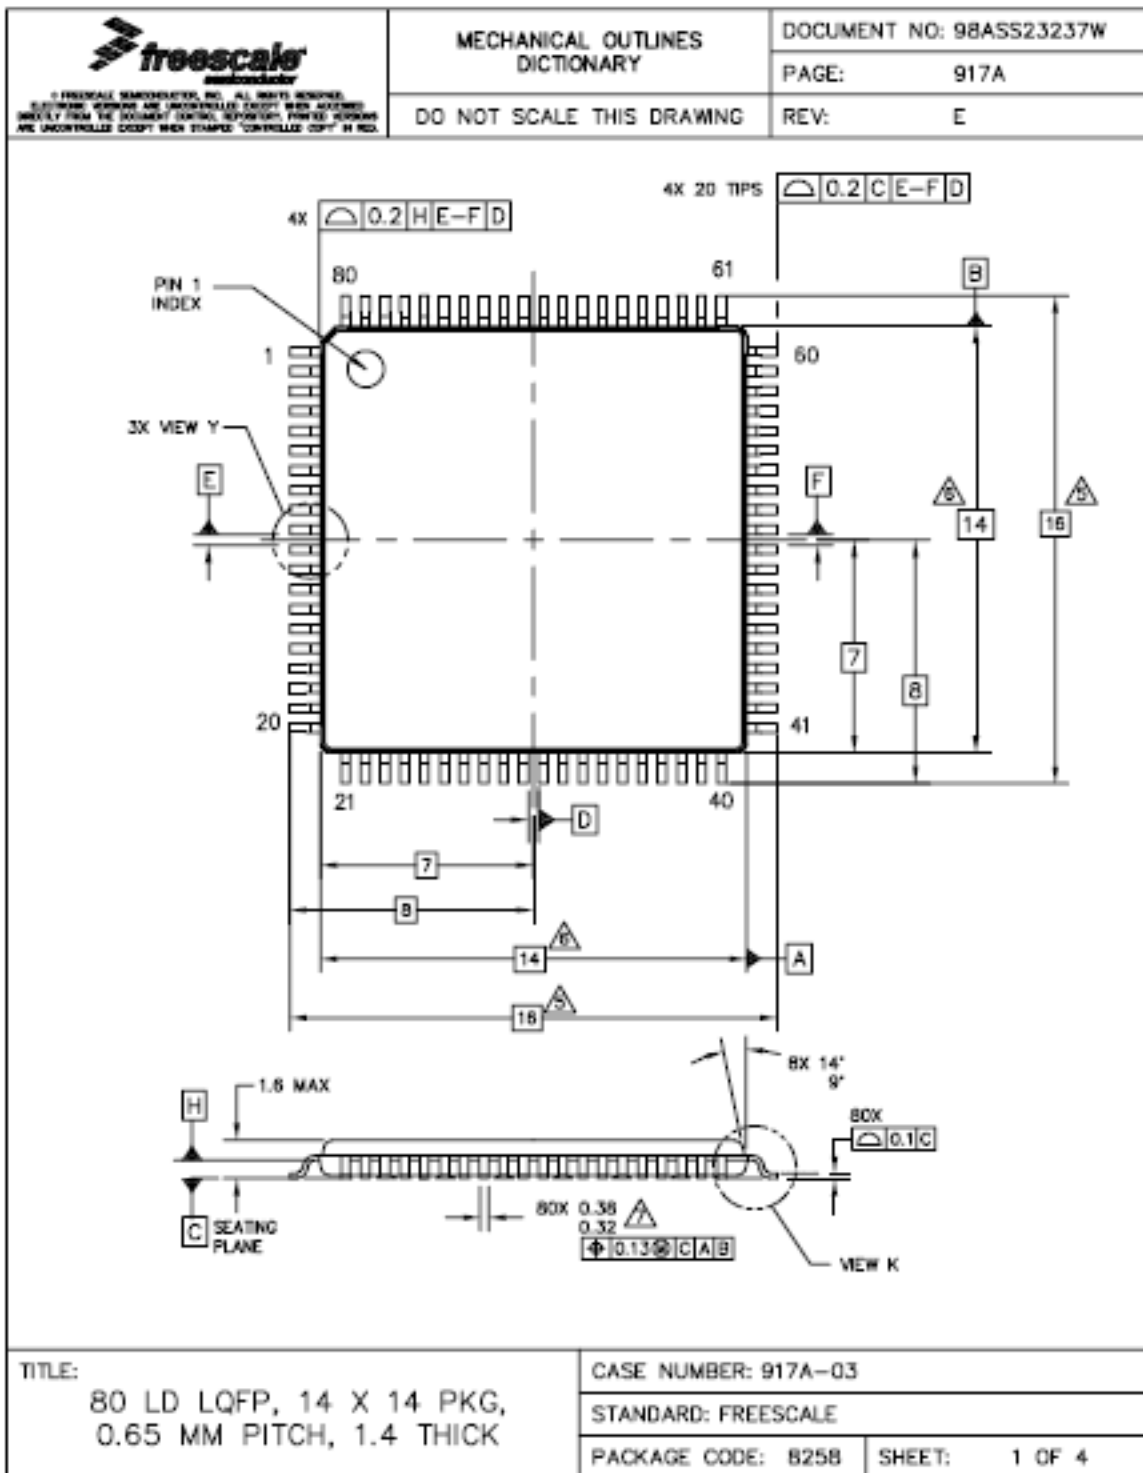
80-Pin Package Outline Drawing (1 of 4)
